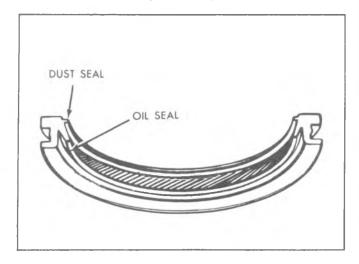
A-58--Crankshaft Oil Seal (Rear Main)
